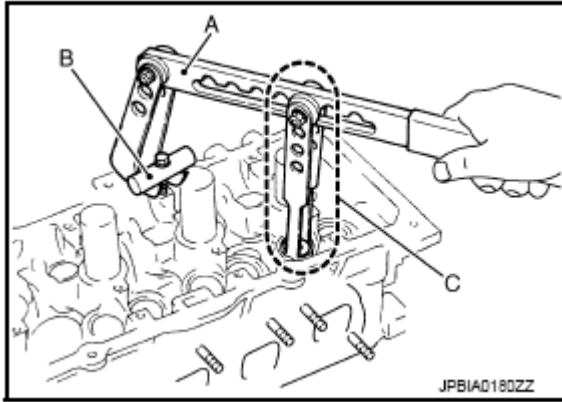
Compressing Valve Spring Using Valve Spring Compressor
